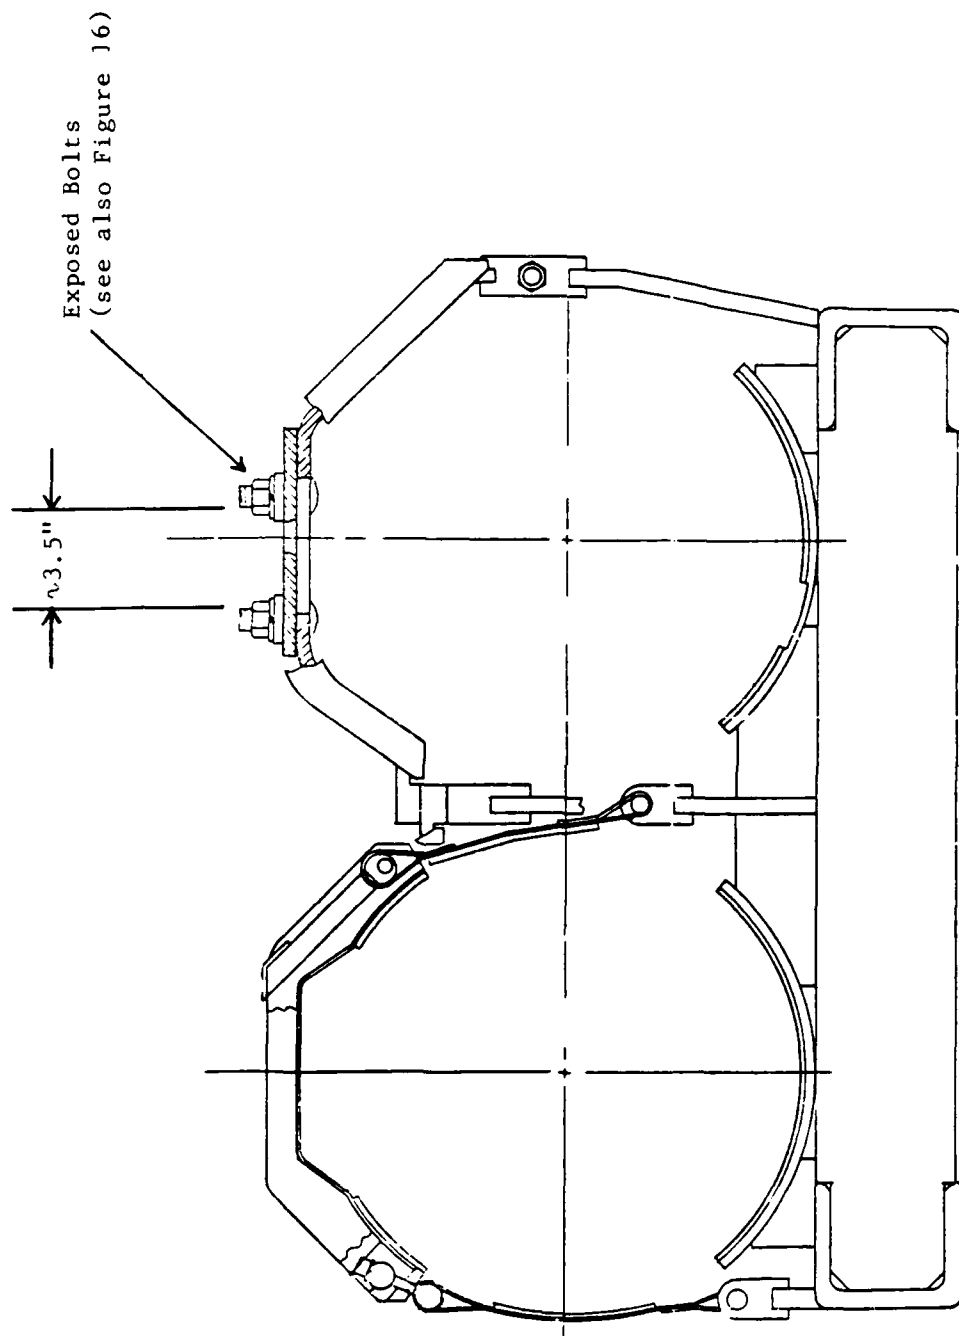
Drawing of Missile Support Saddle Showing Location and Size of Protruding Bolt Shafts (from Reference [9])
